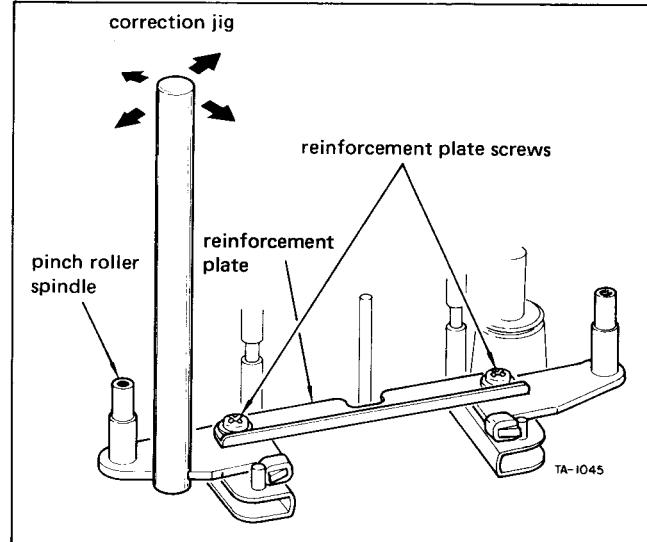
Correction of pinch roller/capstan non-parallelism.
